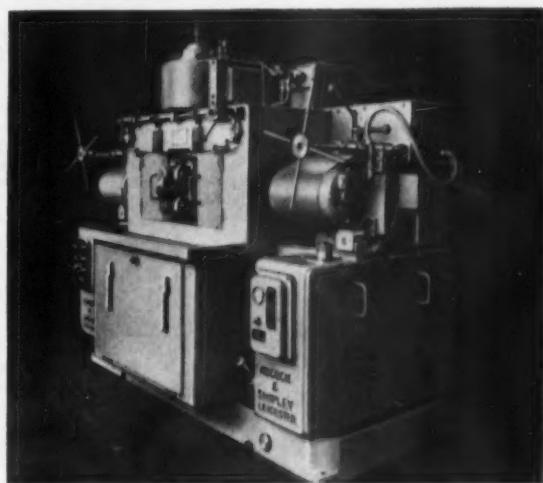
Adcock and Shipley machine for drilling gudgeon pin holes in two pistons simultaneously
